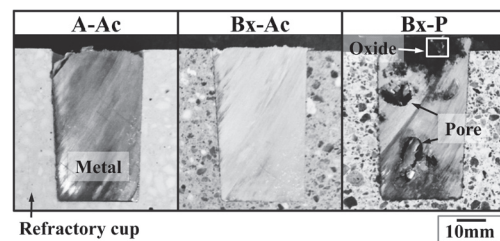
Cross-section surfaces of cups after molten metal holding.
